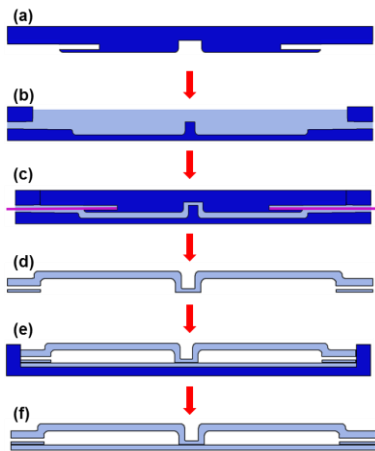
Fabrication process of the actuator insert; (a) a positive mold (top mold); (b) negative mold (bottom mold) filled with liquid elastomer; (c) assembled top and bottom molds with inserted pins; (d) top part of actuator after thermosetting; (e) top part of actuator sitting on prefilled liquid elastomer; (f) actuator insert after thermosetting.
